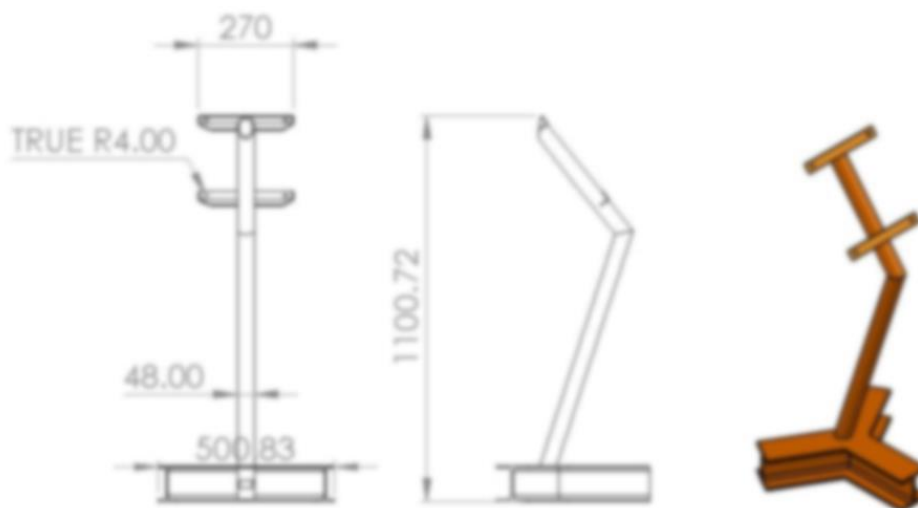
Mechanical Design and Dimensions of The Control Cabinet Support
